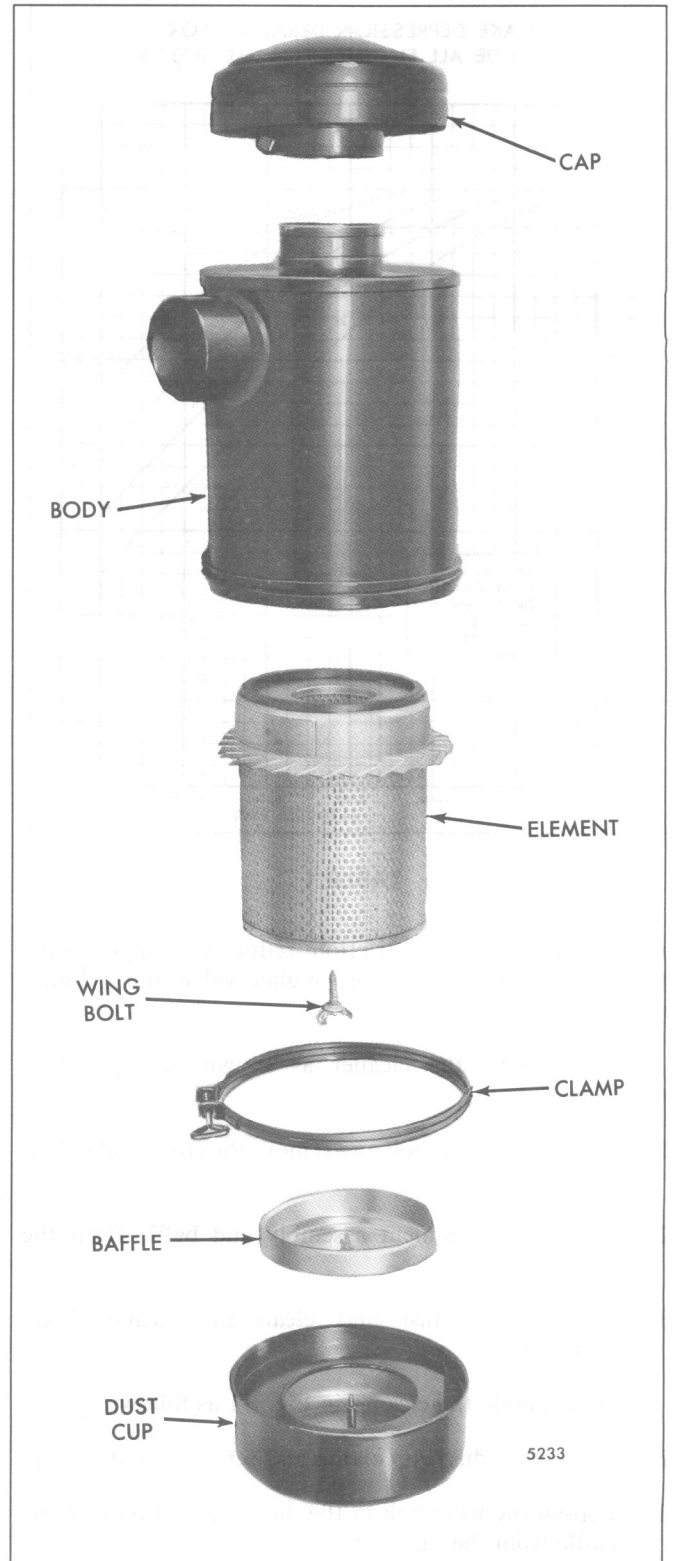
Dry Type Air Cleaner (Heavy Duty)
